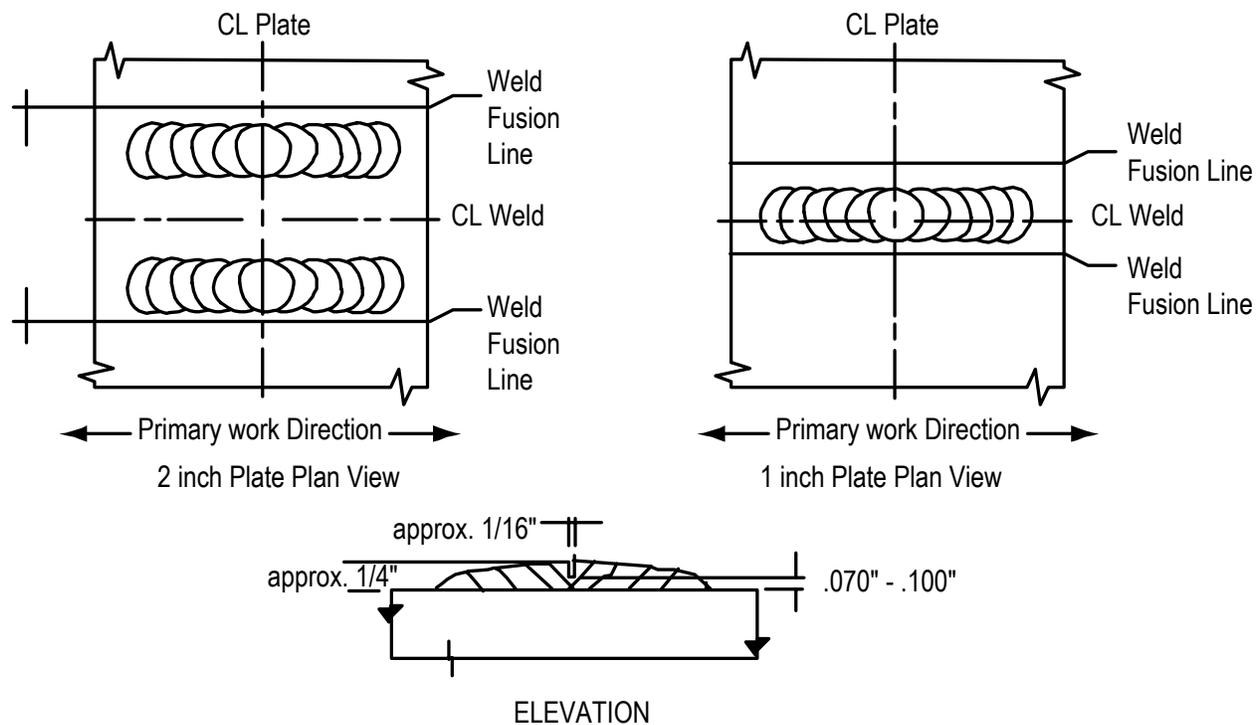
Crack starter bead configuration - base metal evaluation incorporating a weld joint
